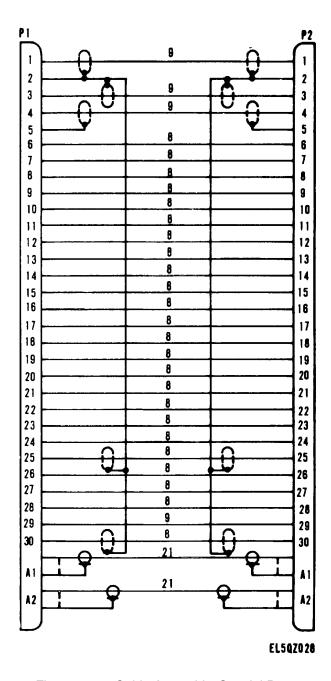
Cable Assembly, Special Purpose, Electrical 217-457578-001 (5W2), Wiring Diagram.
